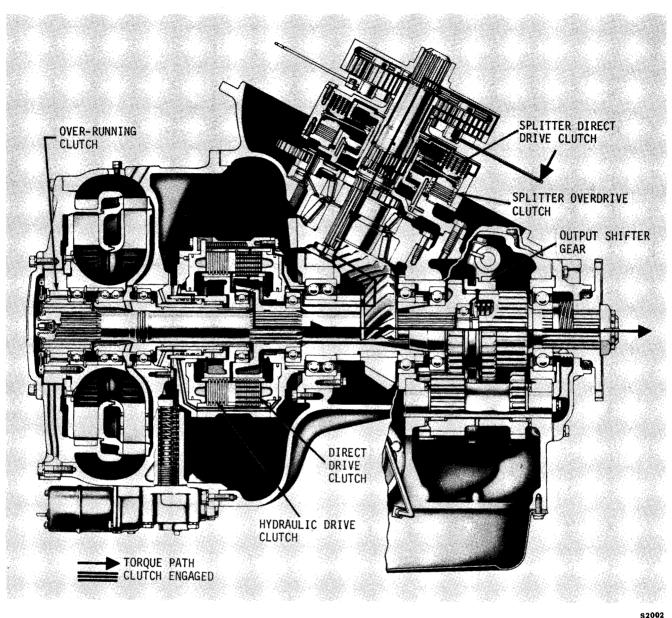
VS2 Series, forward, direct drive, first gear—torque path
